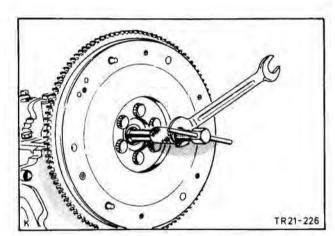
Withdraw crankshaft needle bearing using Special Tool 21-036
